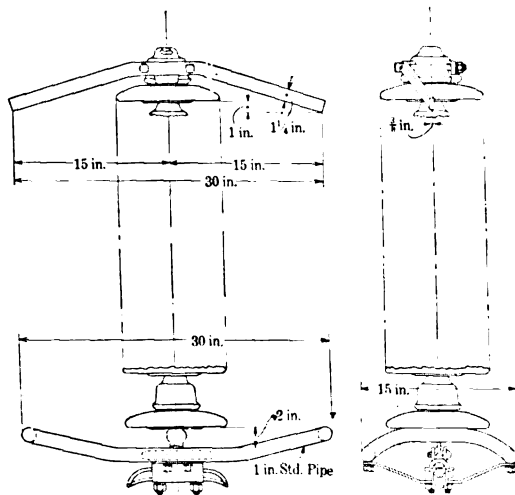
ARCING RING AND HORN ASSEMBLY (1926 INSTALLATION) FOR SINGLE SUSPENSION STRING—PHILO-CANTON LINE
